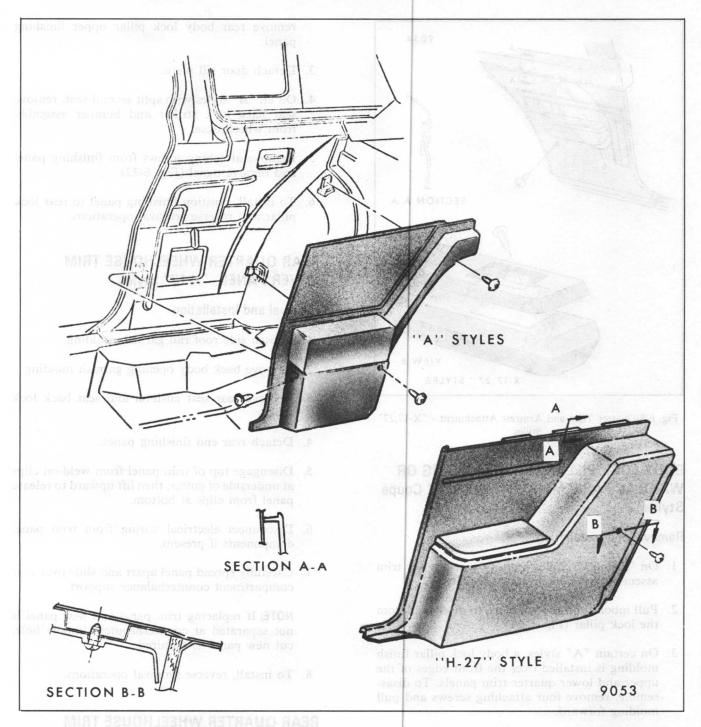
Quarter Trim Assembly Attachment - "A and H-27" Styles
